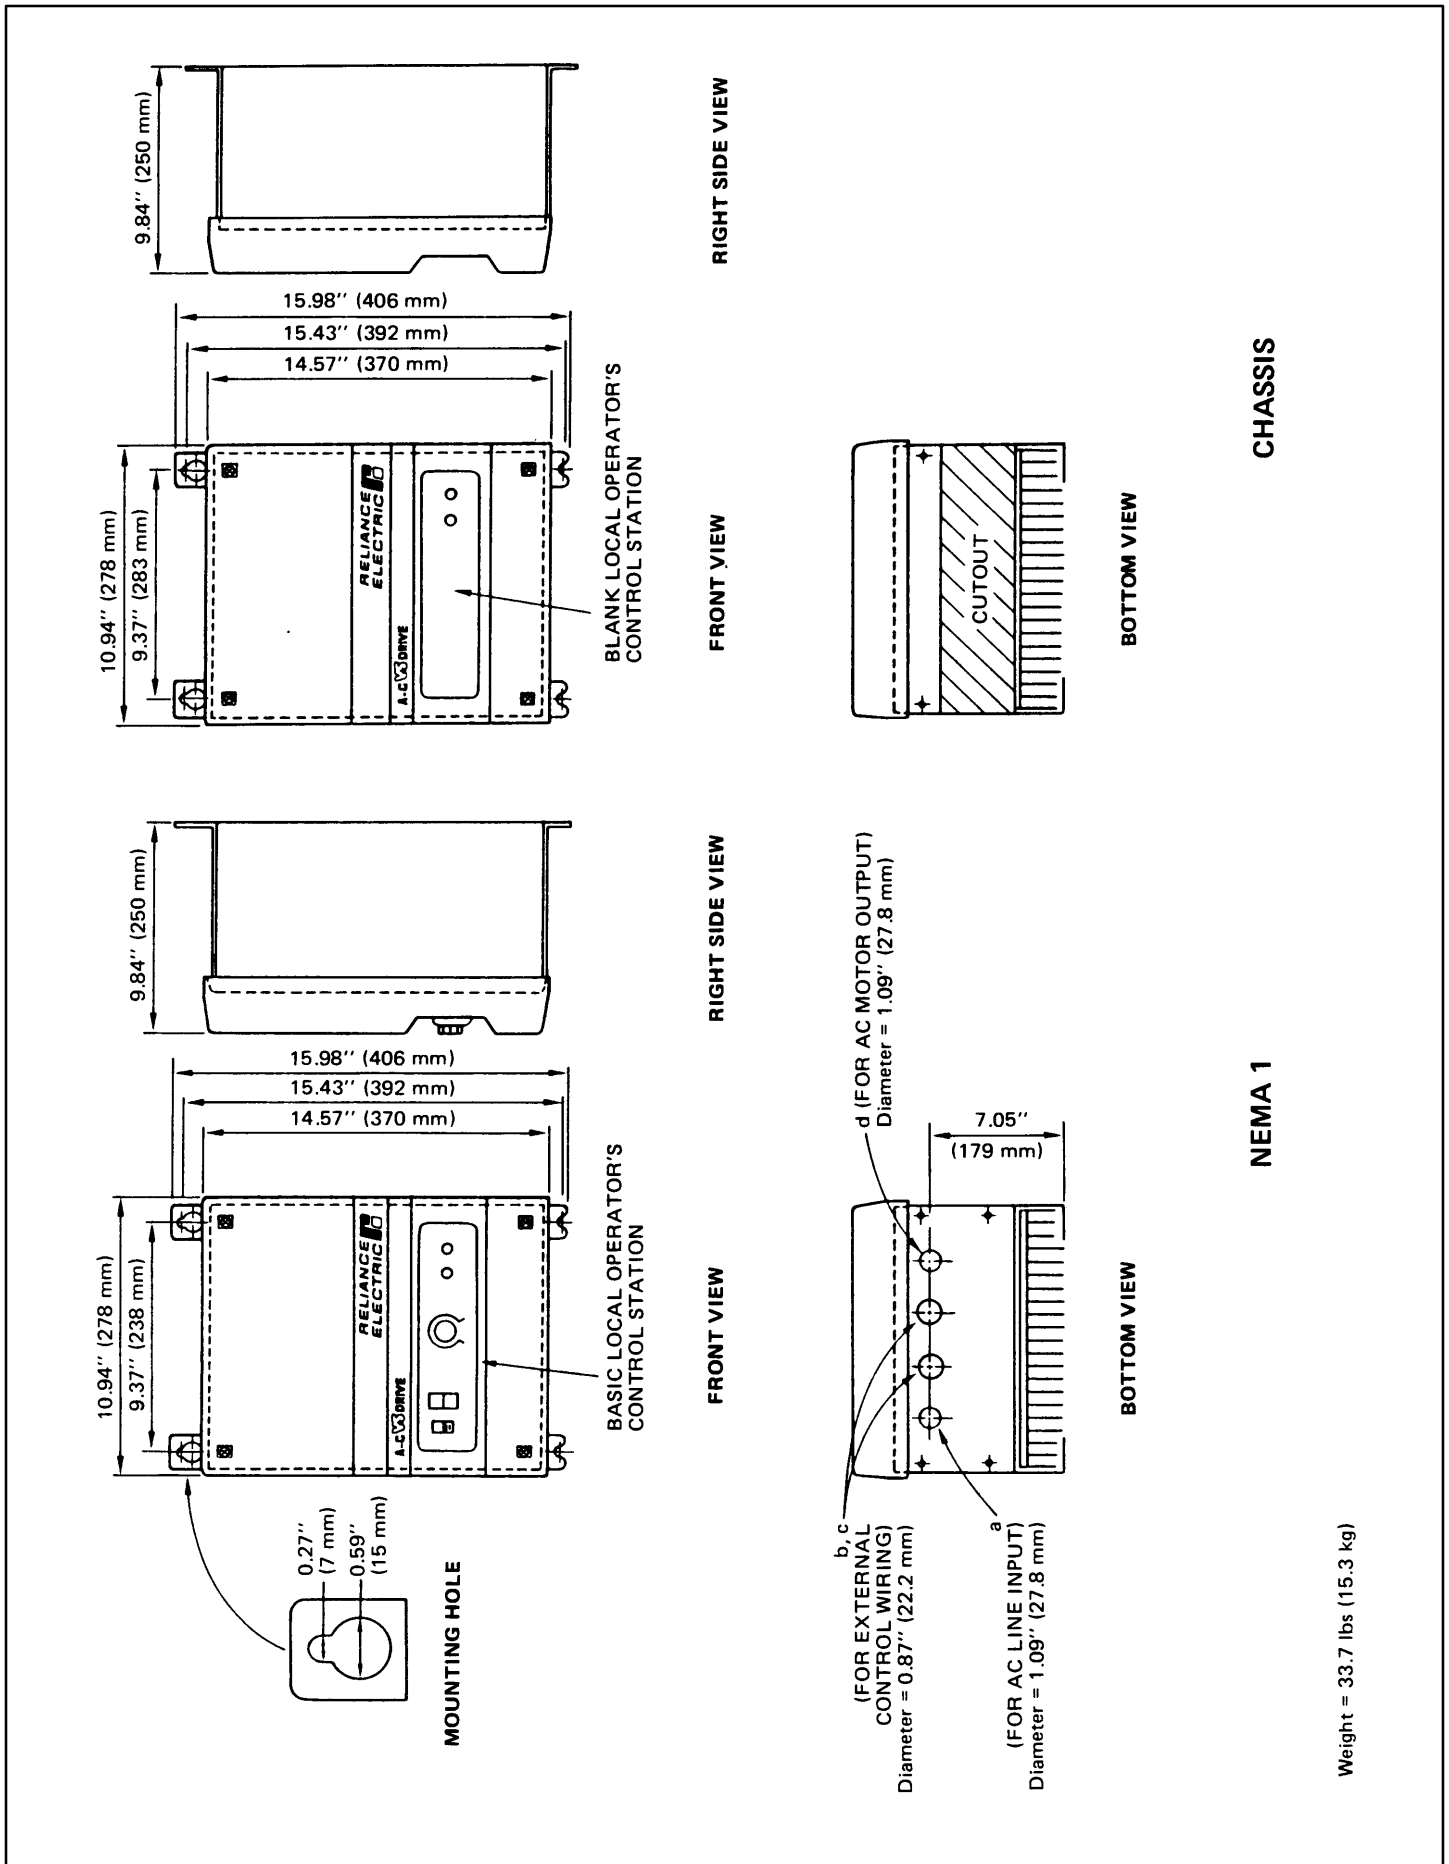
Physical Dimensions and Weights for NEMA 1 Enclosed and Chassis Controllers.
